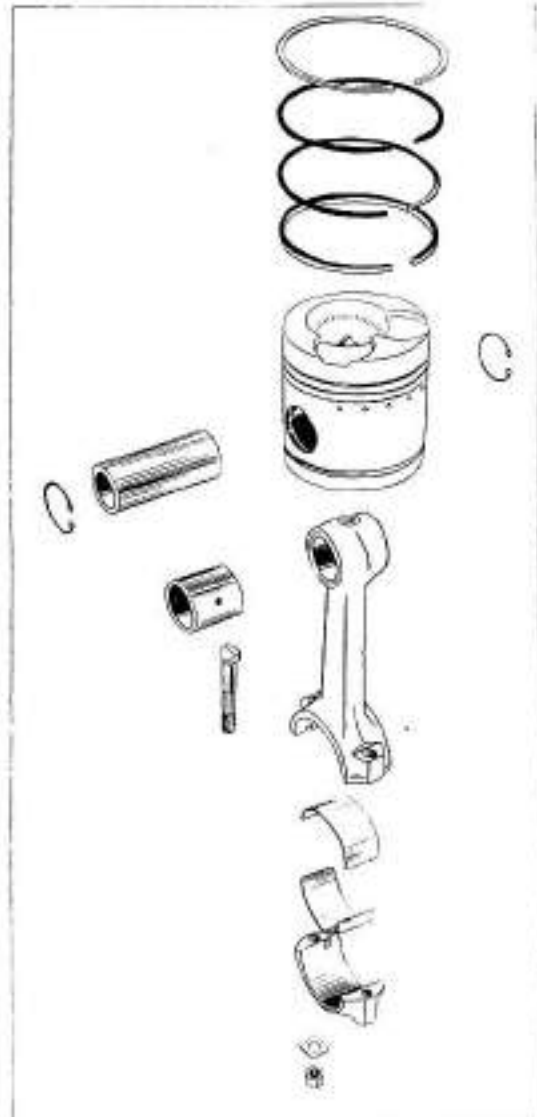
EXPLODED VIEW OF CONN-ROD AND PISTON
